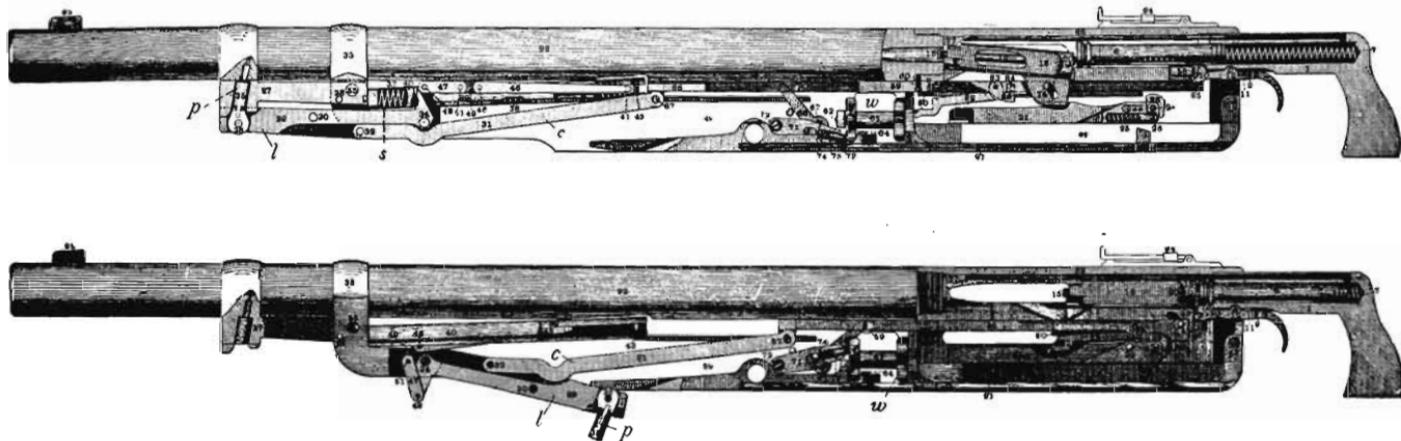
Colt .30-Caliber Automatic Machine Gun.
